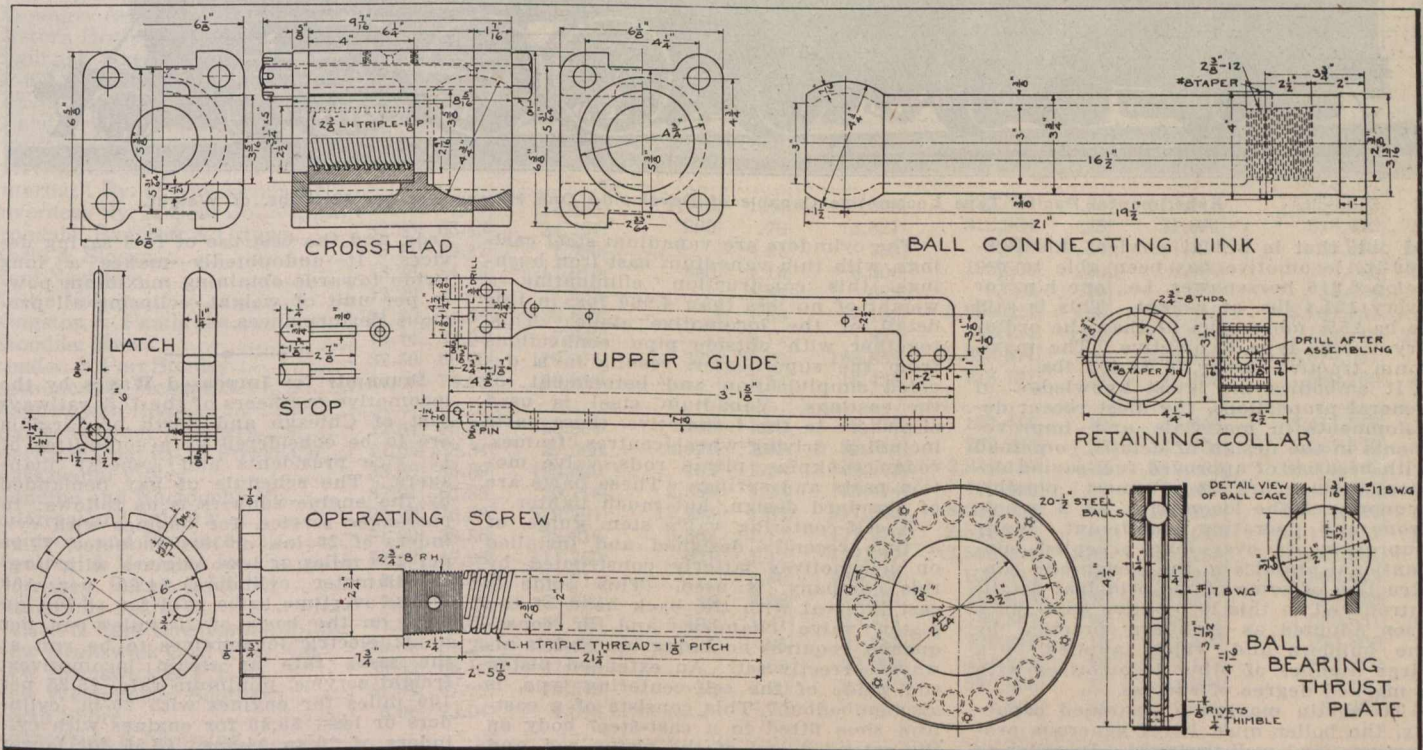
Main Details of the Screw Reverse Gear Mechanism.
